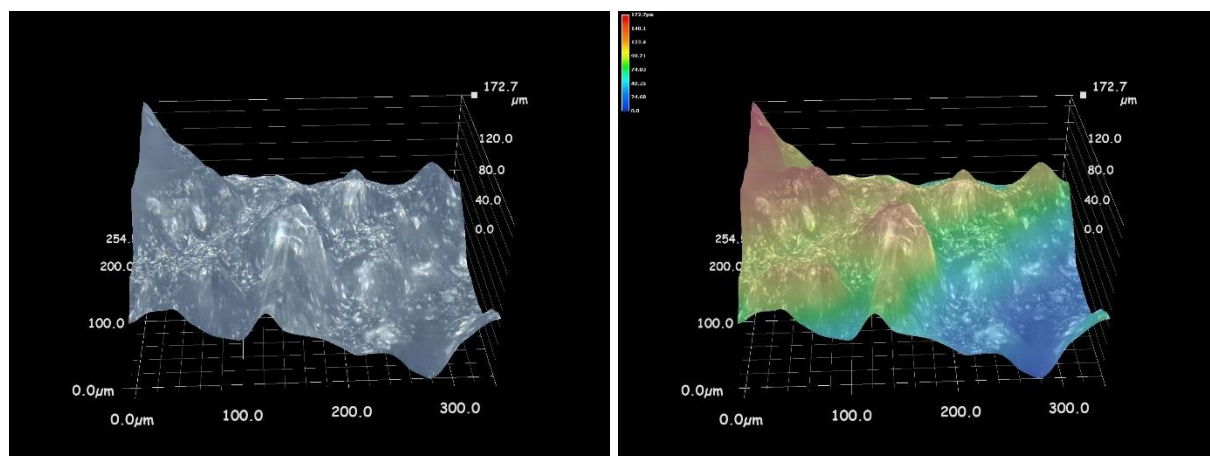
3D representation: the fracture surface of 3D print-extruded PP.
